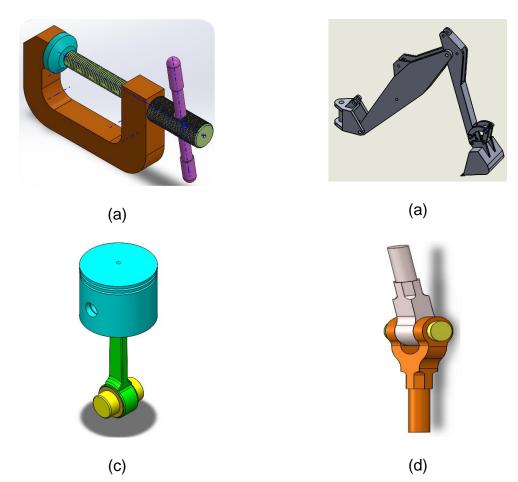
(a) Component design of clamps C; (b) Component design of excavator arm; (c) Component design of seher piston kits; (d) Component design of knuckle joint
